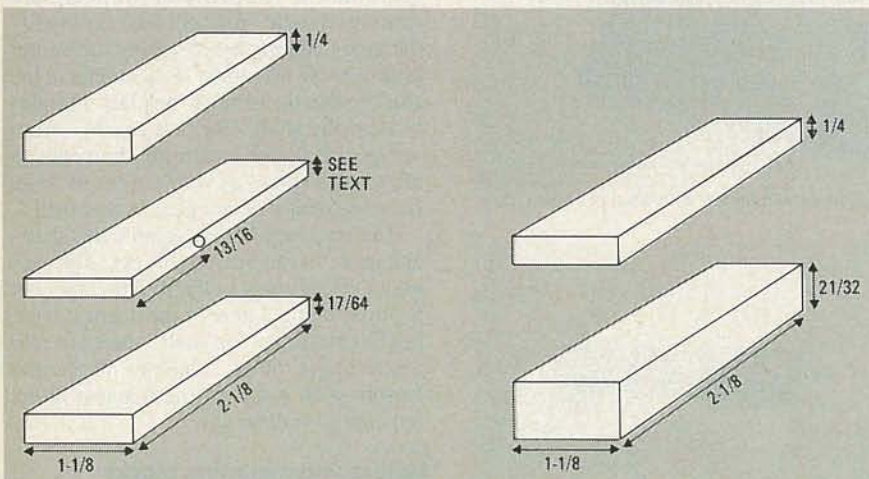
MOTOR-MOUNTING BLOCK DIMENSIONS. The dimensions shown are for the author's system. You may have to change the dimensions to fit your motors.
